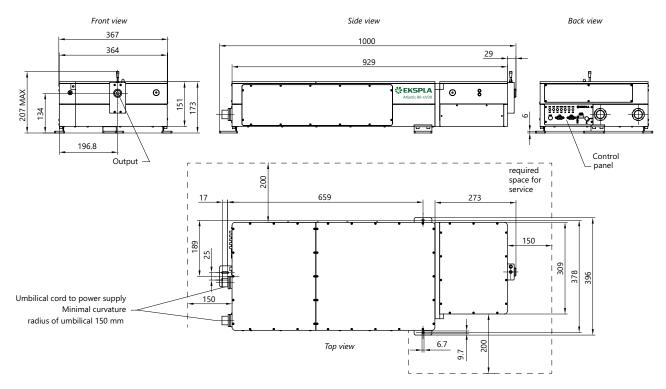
Outline drawings of Atlantic 50-UV18, 80-UV30 laser head with a single 355 nm output (dimensions in mm)
